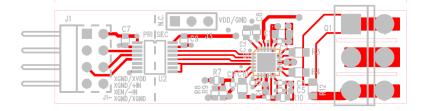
NCP51705 SMD Mini Board TOP/BOTTOM Assembly Drawing
